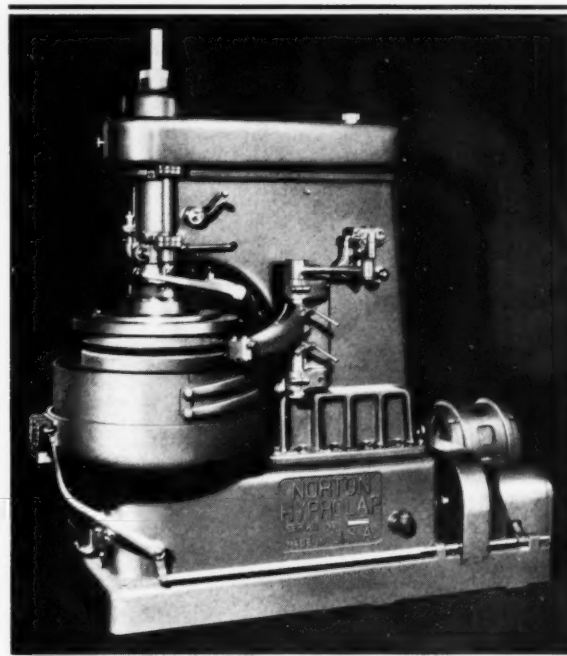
Norton Machine that Laps Flat and Cylindrical Work on a Production Basis
